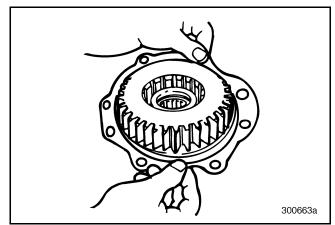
Removing Gasket from Main Drive Pinion Bearing Cover
